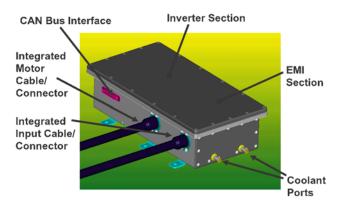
Honeywell PEM Turbocompressor Motor Controller
